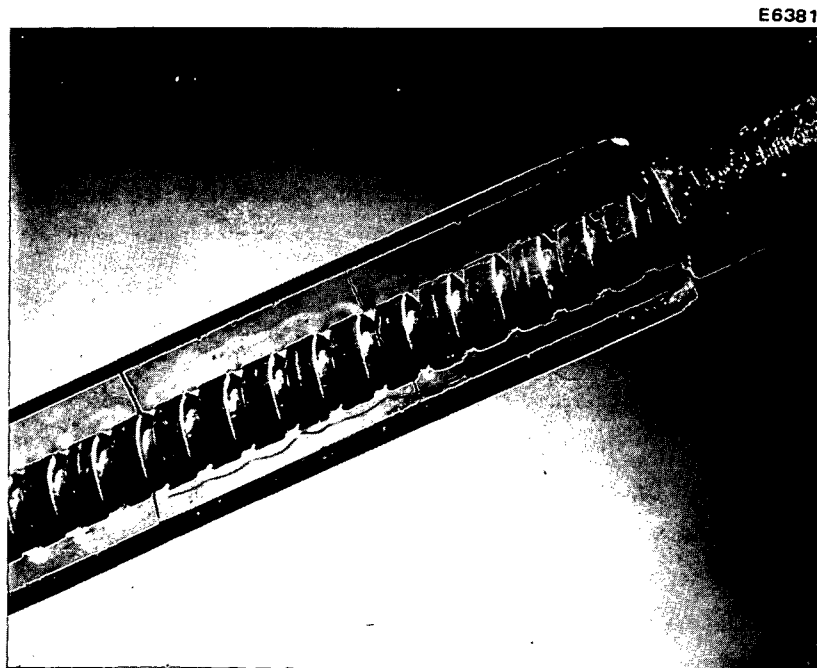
Diamond supported helix assembly using old fabrication technique.
